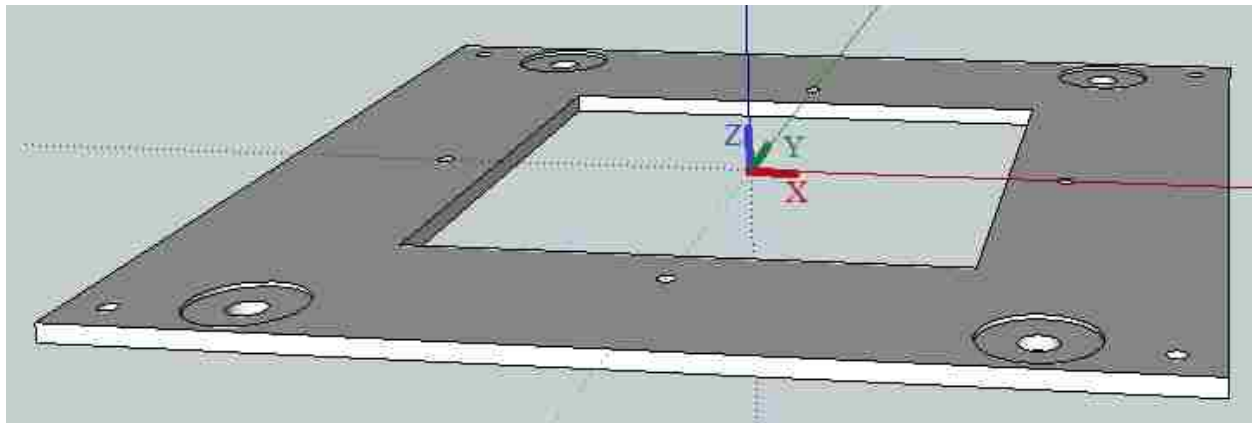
Orthogonal view of the 10x10 cm² lower trimmer aluminum plate.
